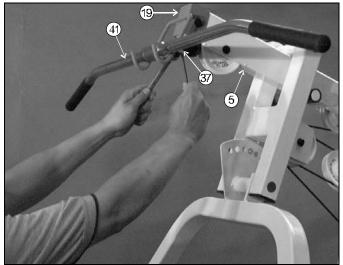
Connect the Lat Bar (#41) to the Lat Cable (#37) using one Strap Bracket (#102), one Shoulder Bolt 3/8 X 3/4 (#101) and one Nylon Insert Lock Nut 5/16-18 (#83). Use the supplied Hex Key 3/16 (#108) to properly fasten this assembly. Refer to Fig. A on page 21 for further illustration of this assembly.
